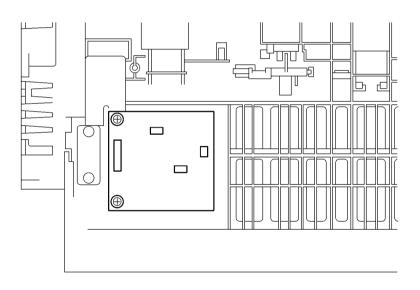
Duplex Unit Board (PWB-AD) Removal
